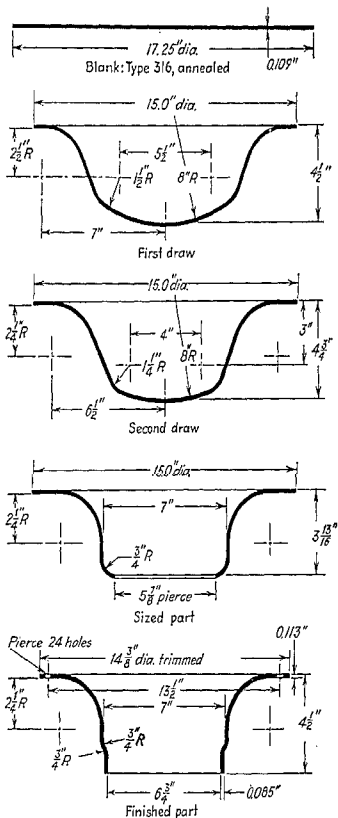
An example of a draw using a high blankholding pressure.²
